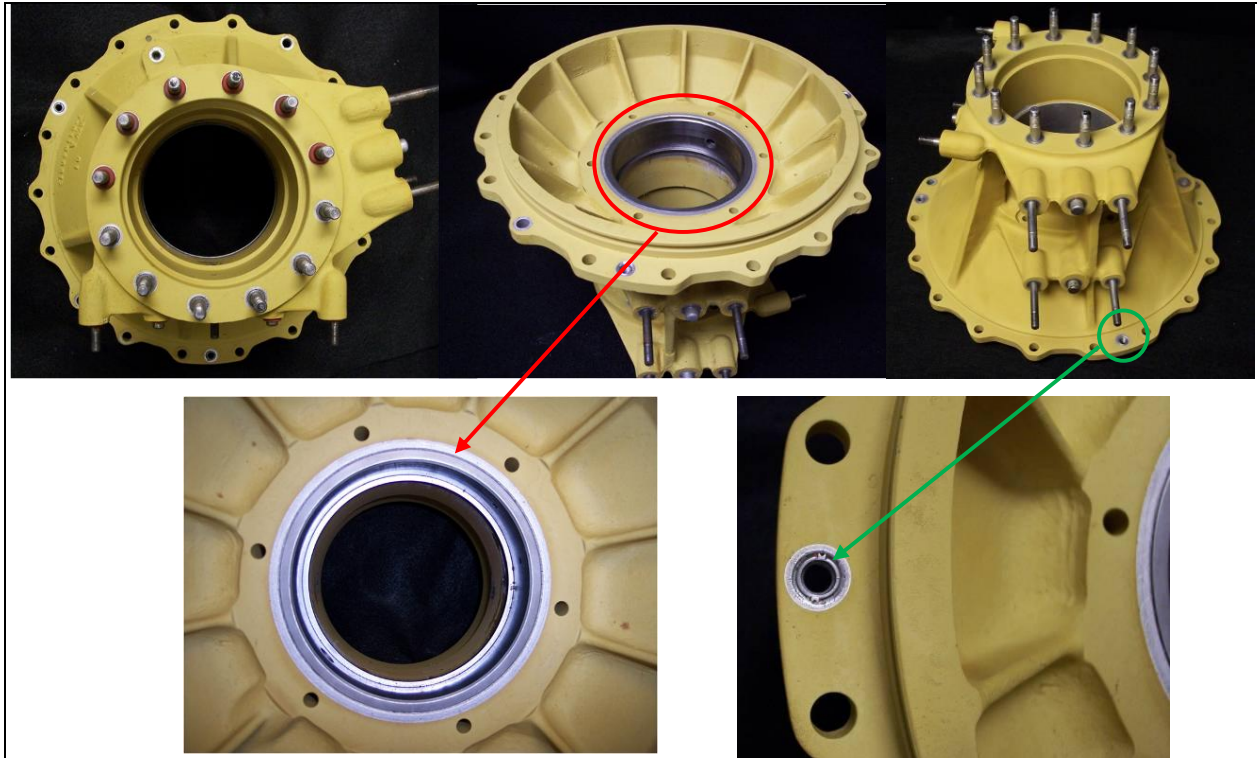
H-64 tail rotor cover after Immersion Tagnite 8500. Lower left: close-up of steel liner bottom after masking removal. Lower right: close-up of helicoid after masking removal.
